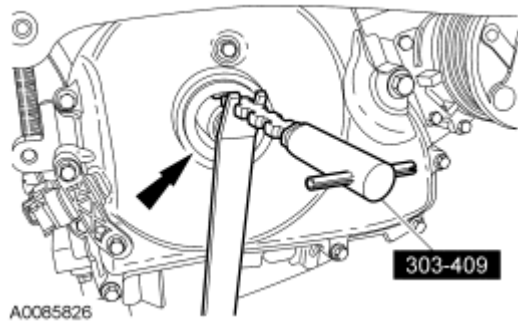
Locating Crankshaft Front Oil Seal And Special Tool (303-409)
